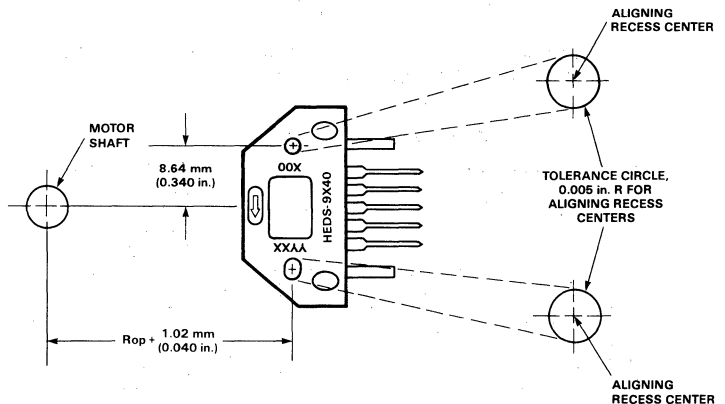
HEDS-9X40 Mounting Tolerance.
